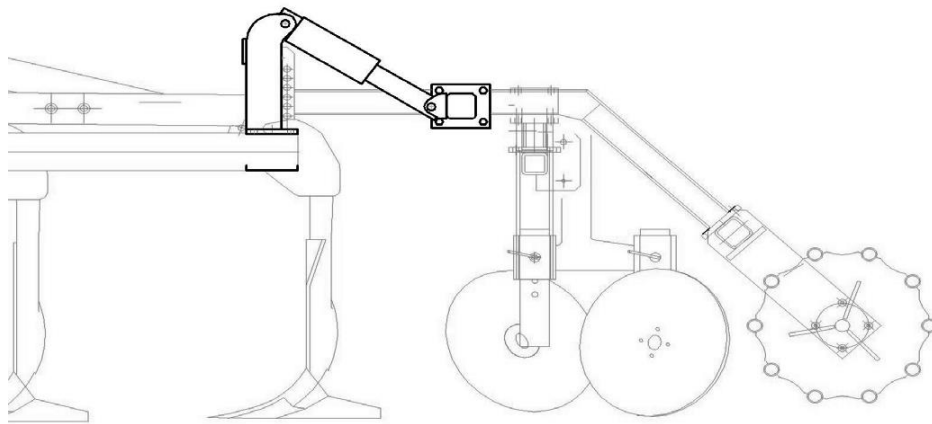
Roller hydraulic adjustment: 1 – actuator, 2 – beam with arm holder, 3 – actuator holder.
